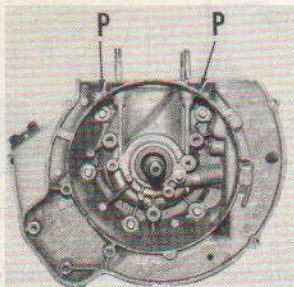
A—Drive tapered pins (P) out before separating crankcase halves.
